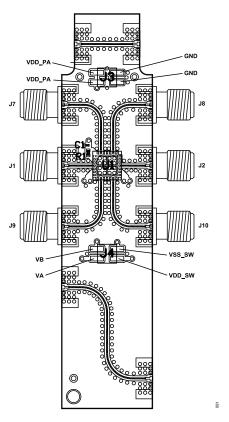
ADL8111-EVALZ Evaluation Board PCB
